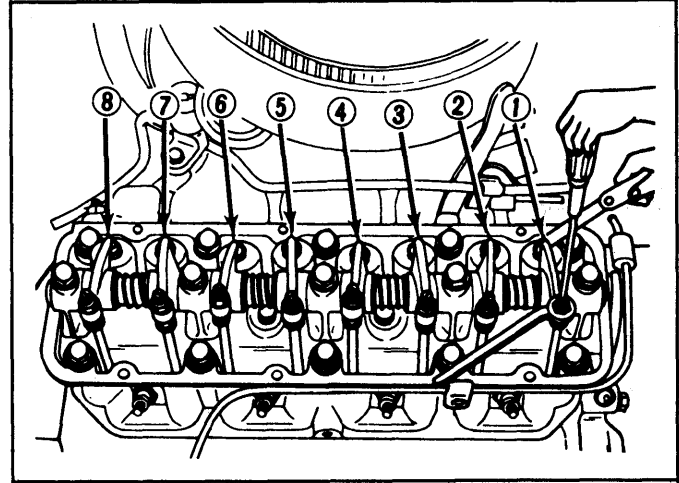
A13, A14 & A15 Engine Valve Clearance Adjustment
